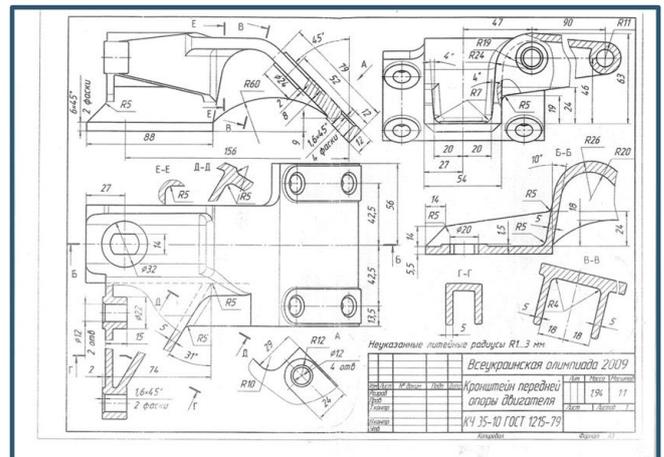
^[7]: Dimensions Sheet Engine Mount Bracket
